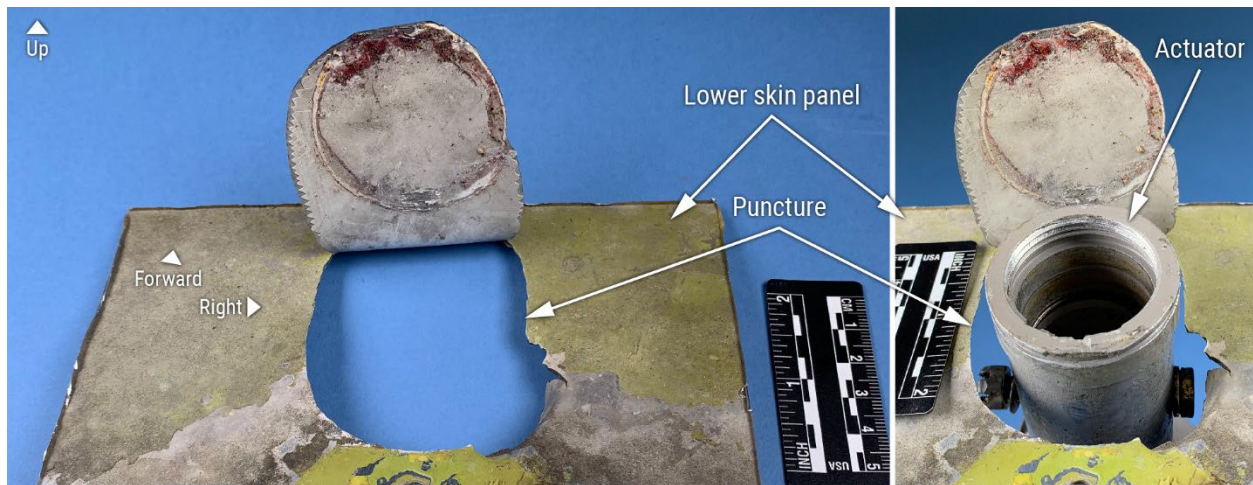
Photographs of the lower skin panel for the horizontal stabilizer.
